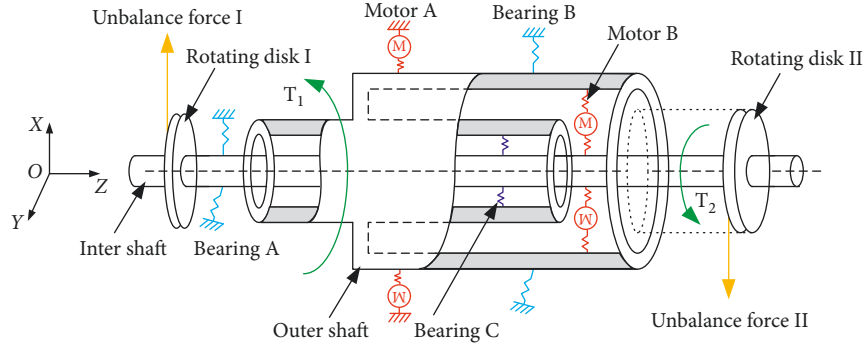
Structural model of compound biaxial system. Rotating disk I is a polyhedron. Rotating disk II is the circular dividing part to be inspected. Bearing A is a ball bearing and Bearing B is a turntable bearing. Bearing C is a dense ball bearing. Motor A and Motor B are torque motors.
